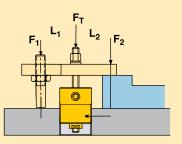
Center-hole cylinder used in hydraulic clamping set-up
